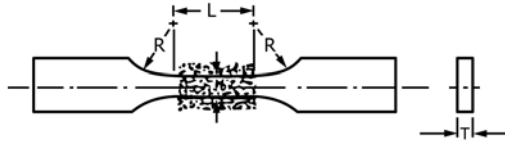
Specimens With Tangentially Blending Fillets Between the Uniform Test Section and the Ends for Axial Loading
